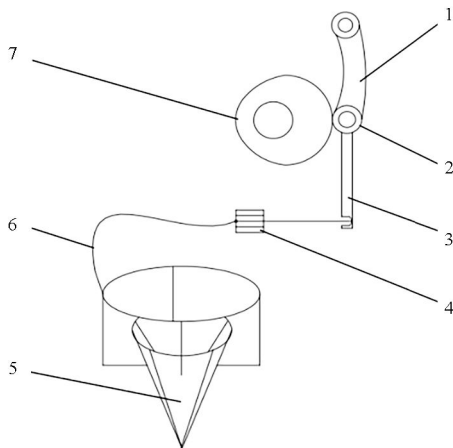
Double-crank multi-link duck-bill breaking film and covering soil mechanism
